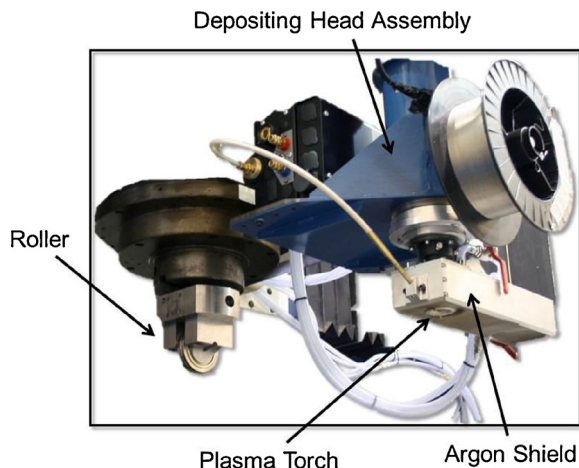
HiVE machine showing deposition torch and spindle with roller assembly.
